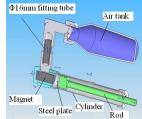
The throwing mechanism: Magnetic Brake Pneumatic Cylinder
